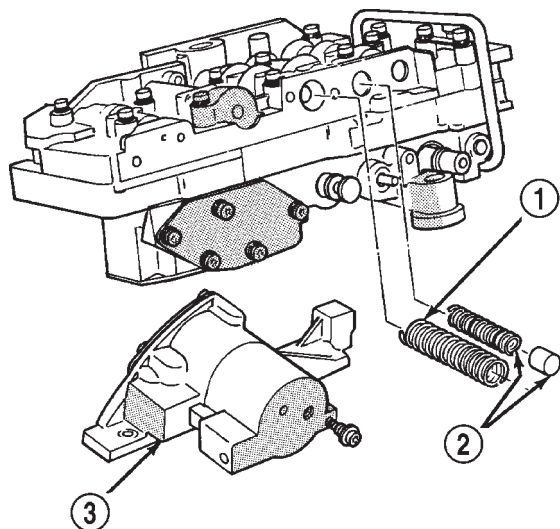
3-4 Shift And Converter Clutch Valve Springs And Plug
